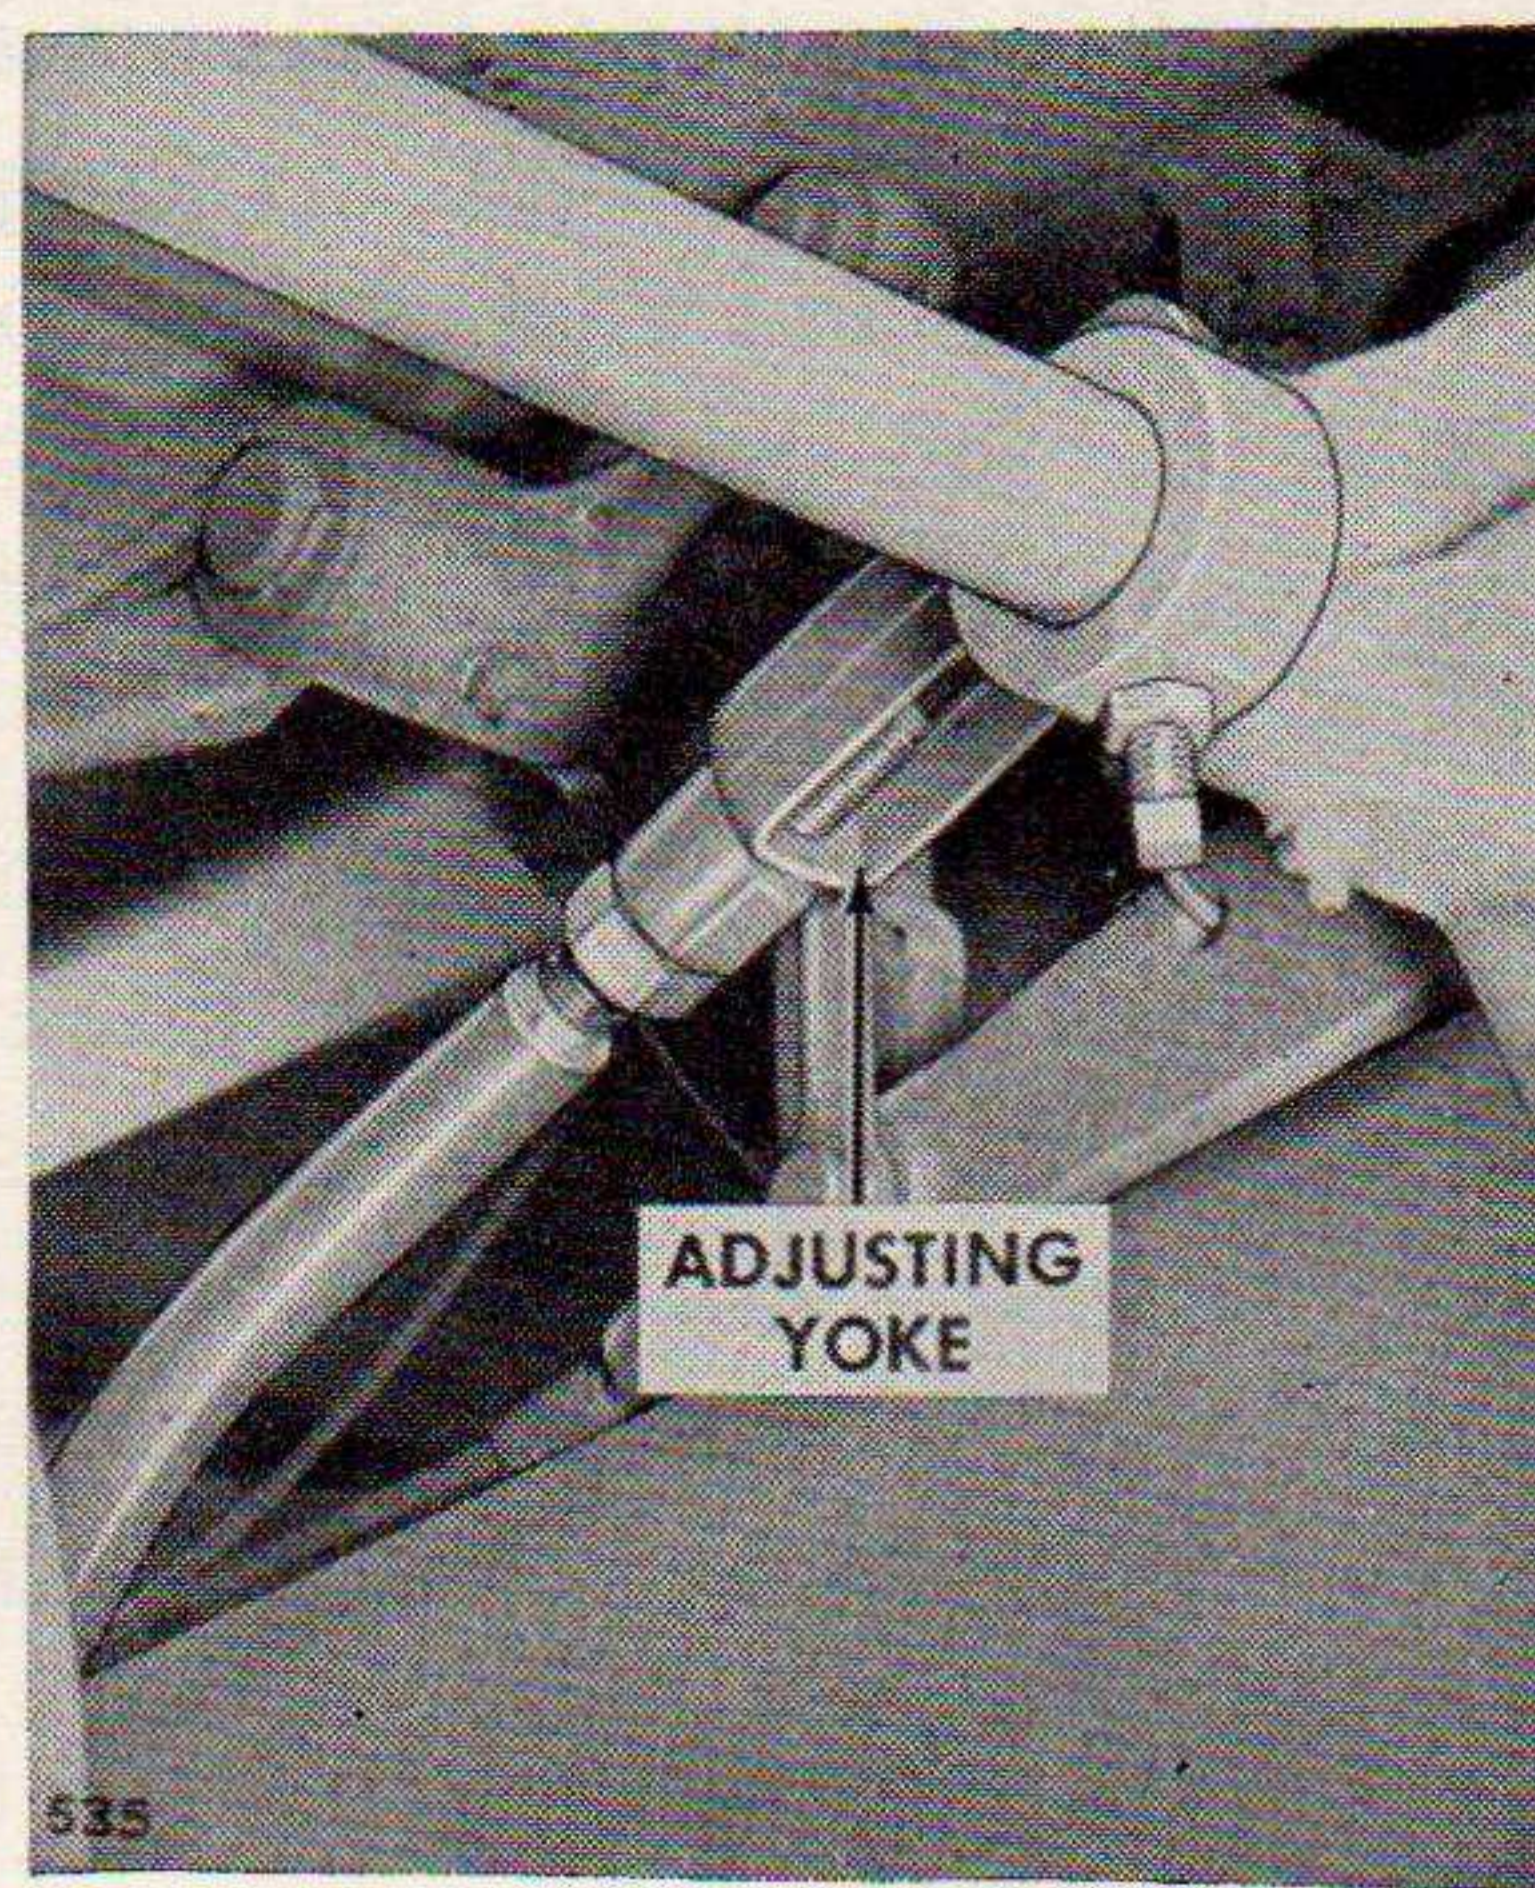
Adjusting clearance between yoke arms and plugs on release bearing.
